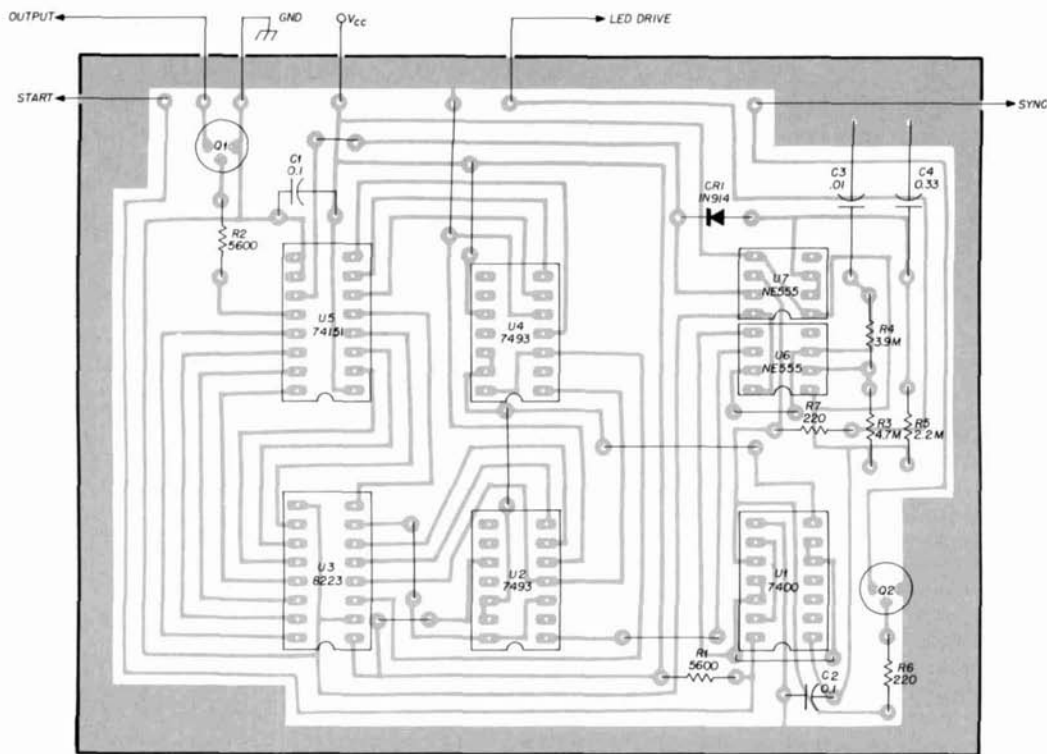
Full-size printed-circuit layout (foil side) for the 256-bit CW memory.
